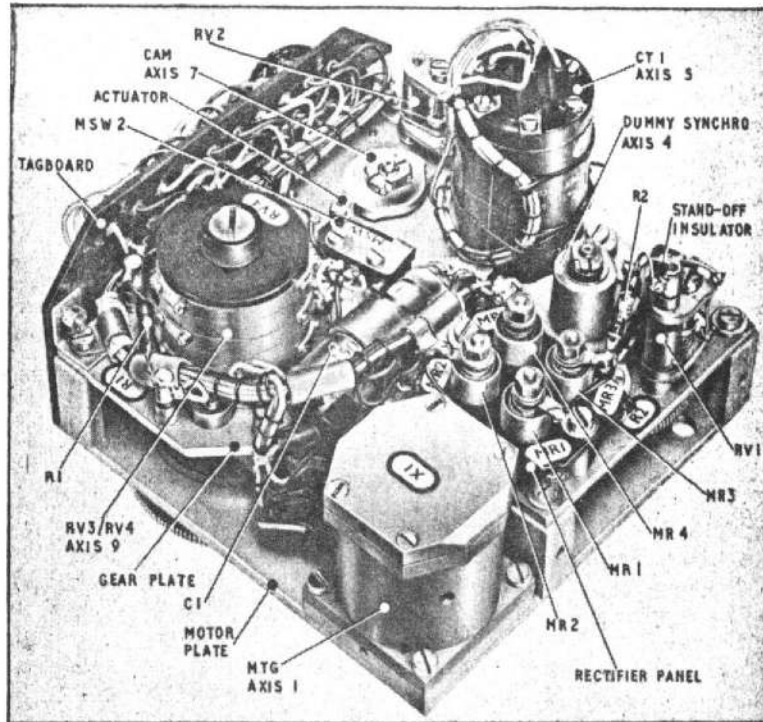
Height gearbox assembly (G3)—view A (pre-mod. ADS/103)
